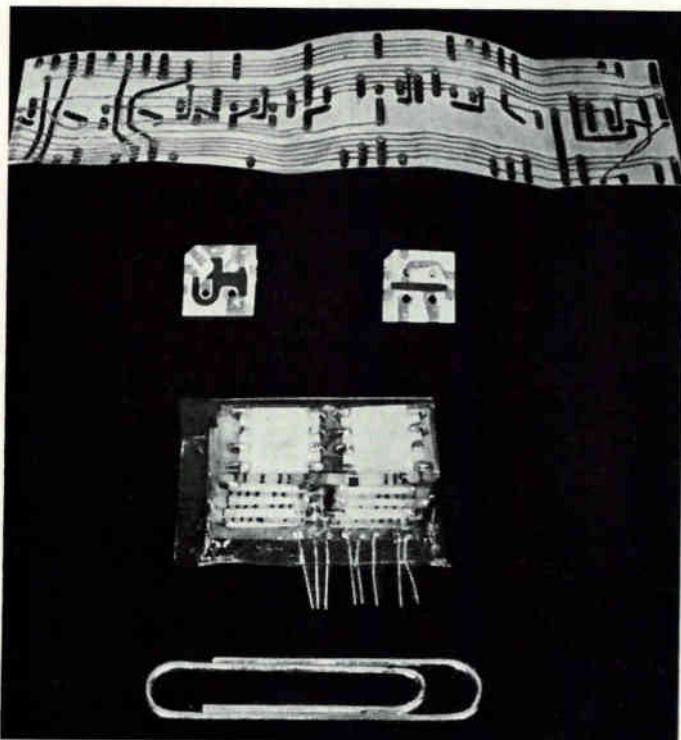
Interconnections of assembly (above) are by circuit board; of other assembly (below), by strip
